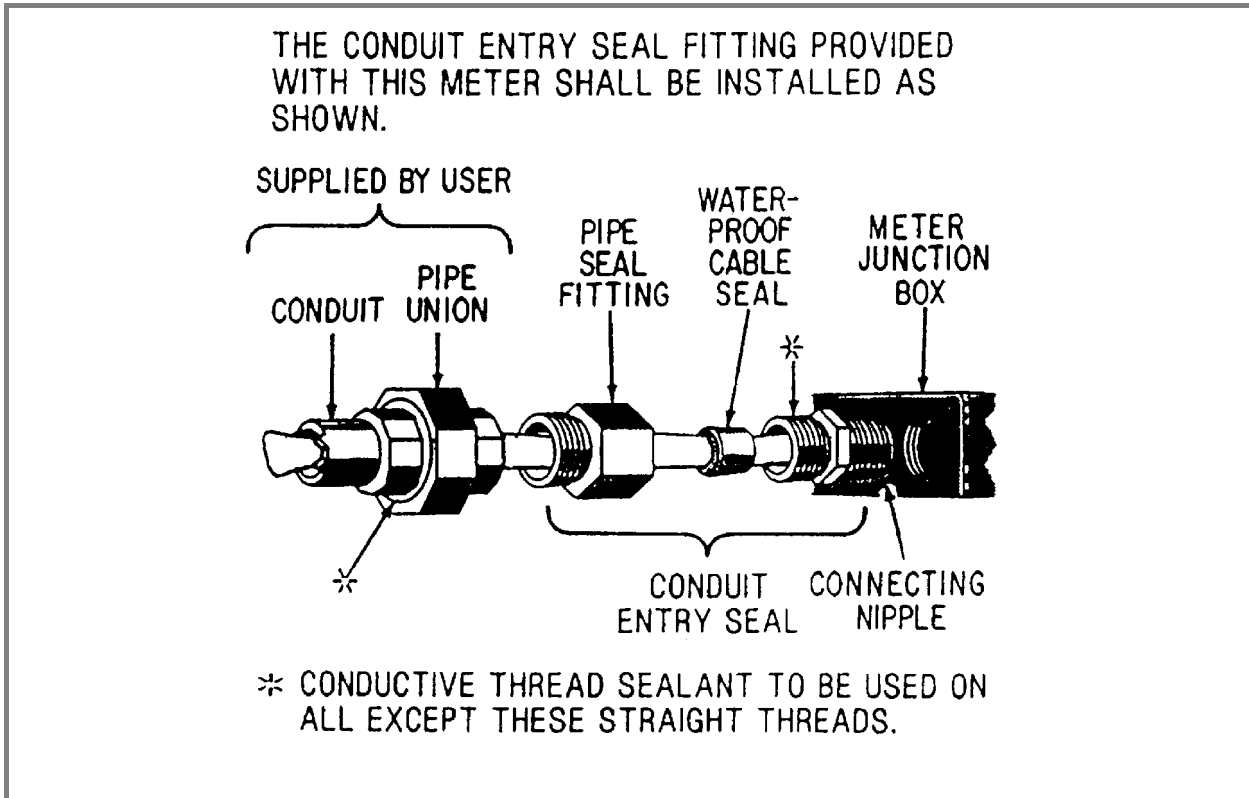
CONDUIT ENTRY SEAL INSTALLATION
